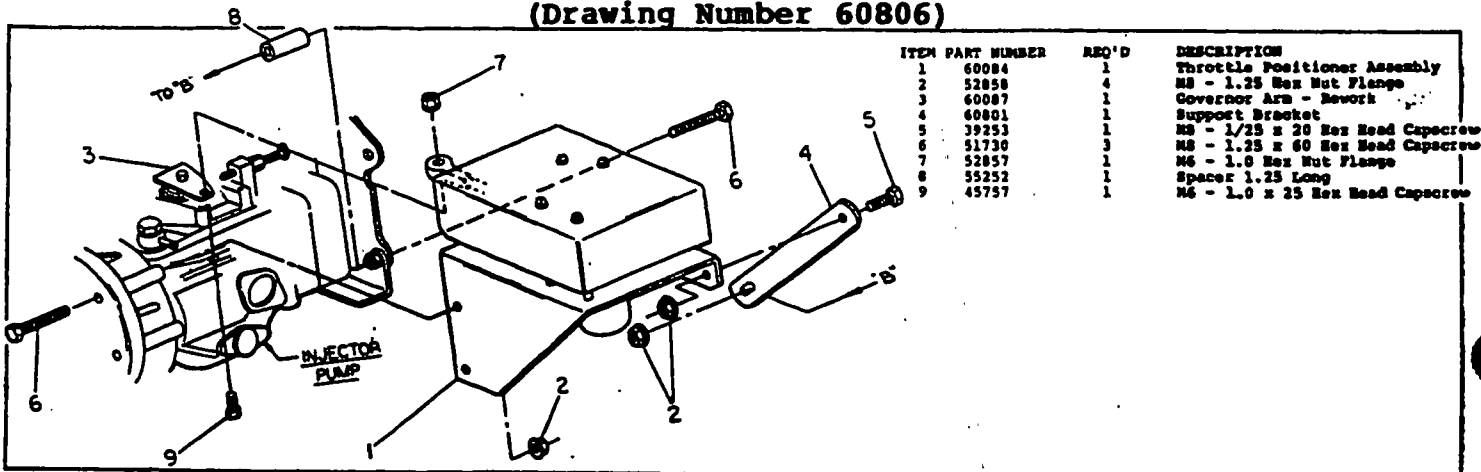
C. Exploded View of Throttle Positioner 2.2 Liter Units
